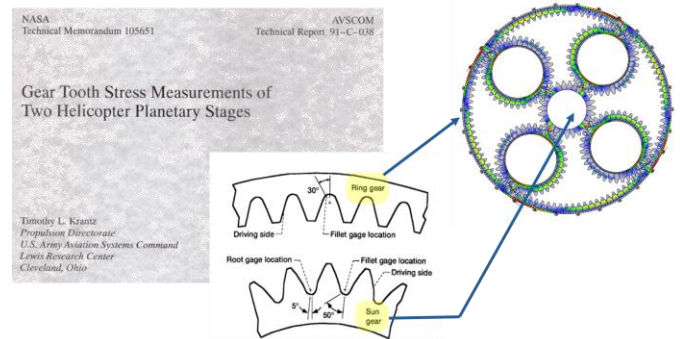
Strain gage locations for sun and ring gears in helicopter planetary gearbox.
